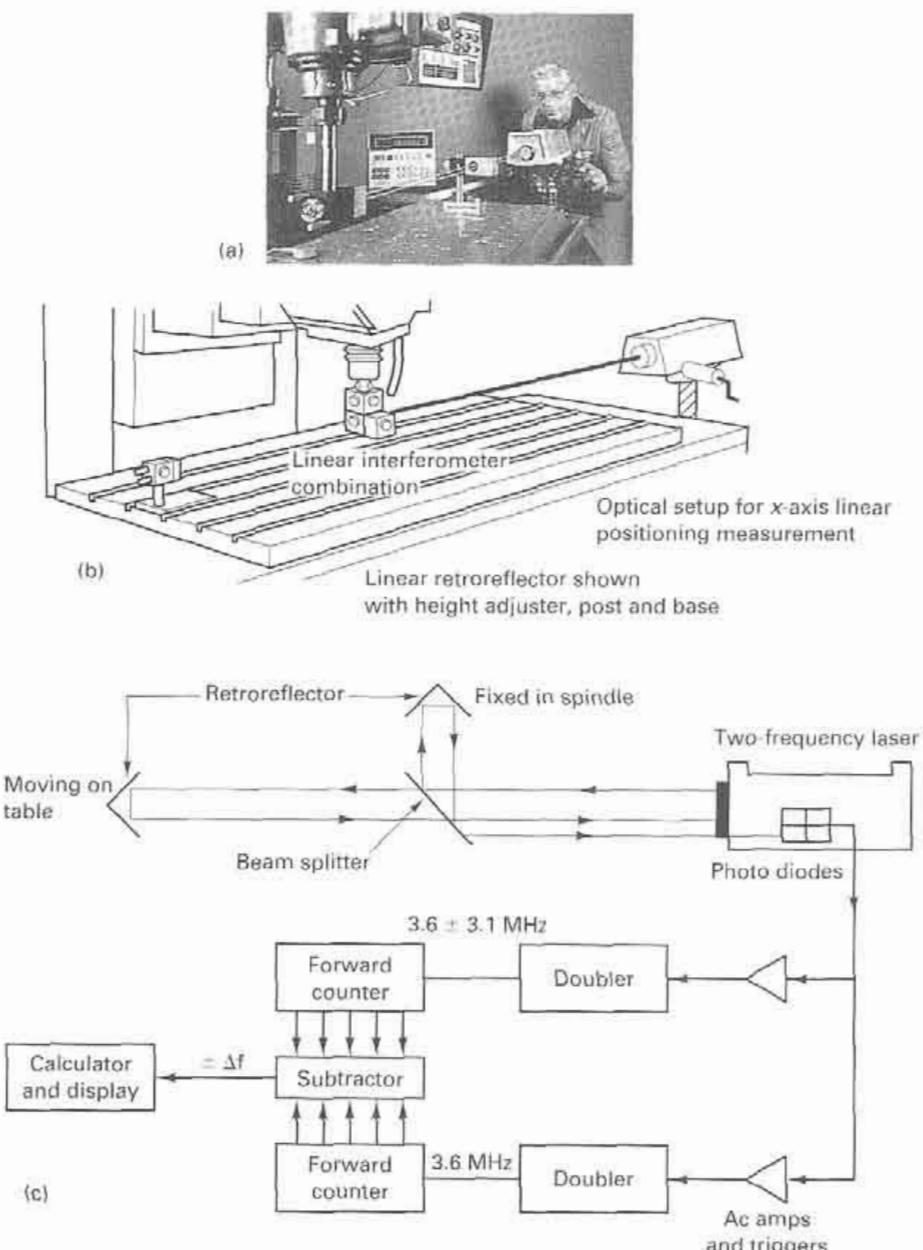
(Top) Calibrating the x-axis linear table displacement of a vertical spindle milling machine; (middle) schematic of optical setup; (bottom) schematic of components of a two-frequency laser interferometer. (Courtesy of Hewlett-Packard.)
